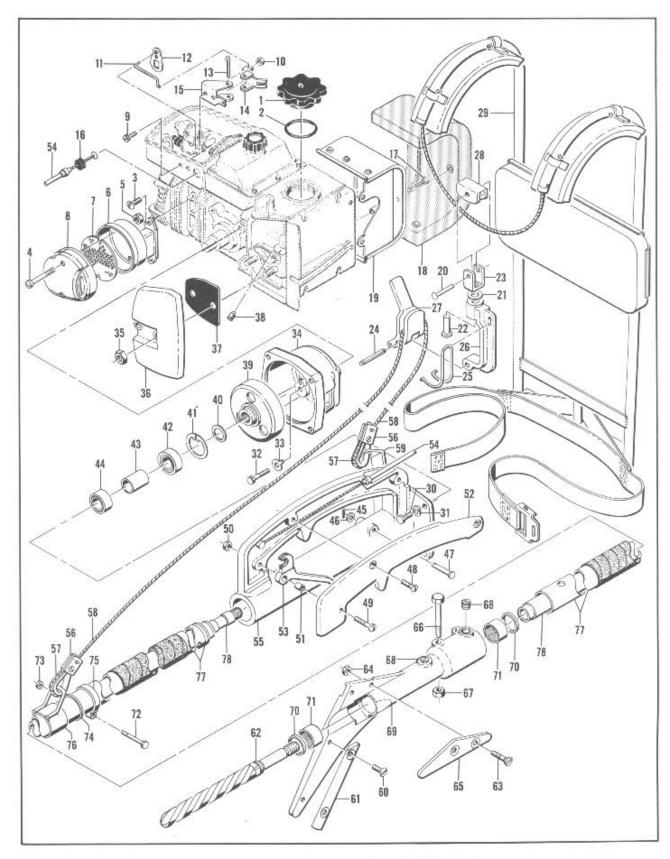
Exploded View - 6 and 12 Foot ROTO-BIT Pruner
